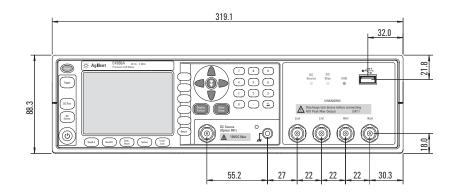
Dimensions (front view, without handle and bumper, in millimeters, nominal)
